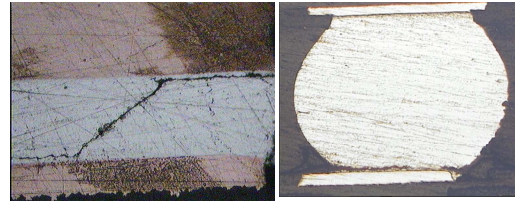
Solder joint failure for VQFN and FBGA assembly
